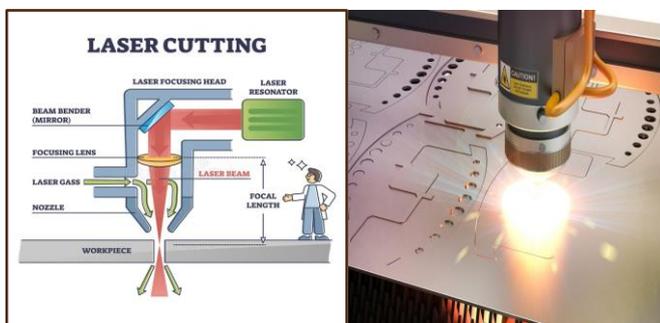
Laser cutting techniques (Google.com and laserflow.com)
